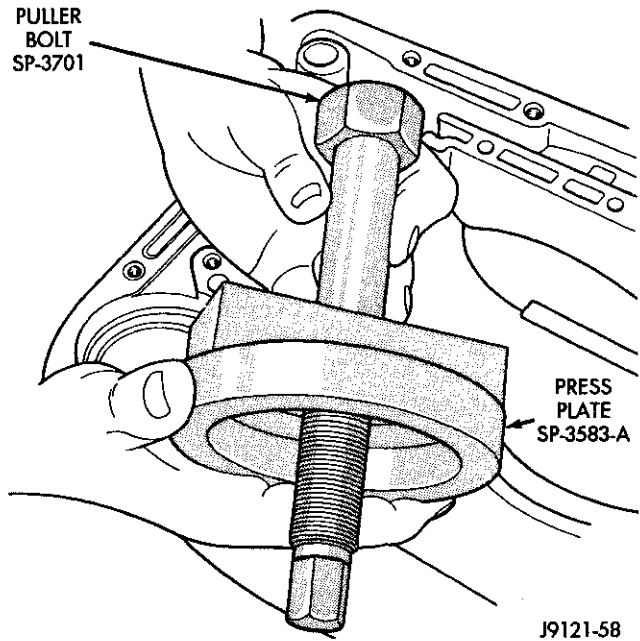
Assembling Clutch Cam Puller Bolt And Press Plate
